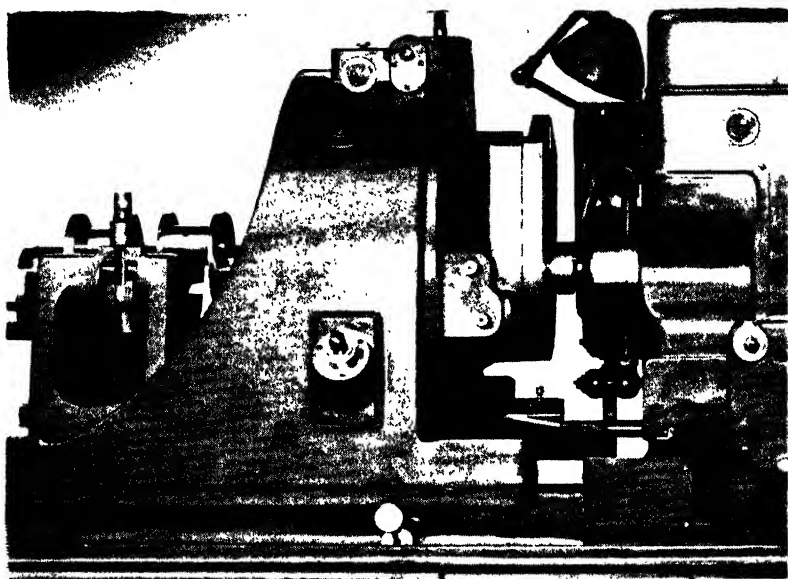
Cutting Splines with Horizontal Type of Gear Shaper
